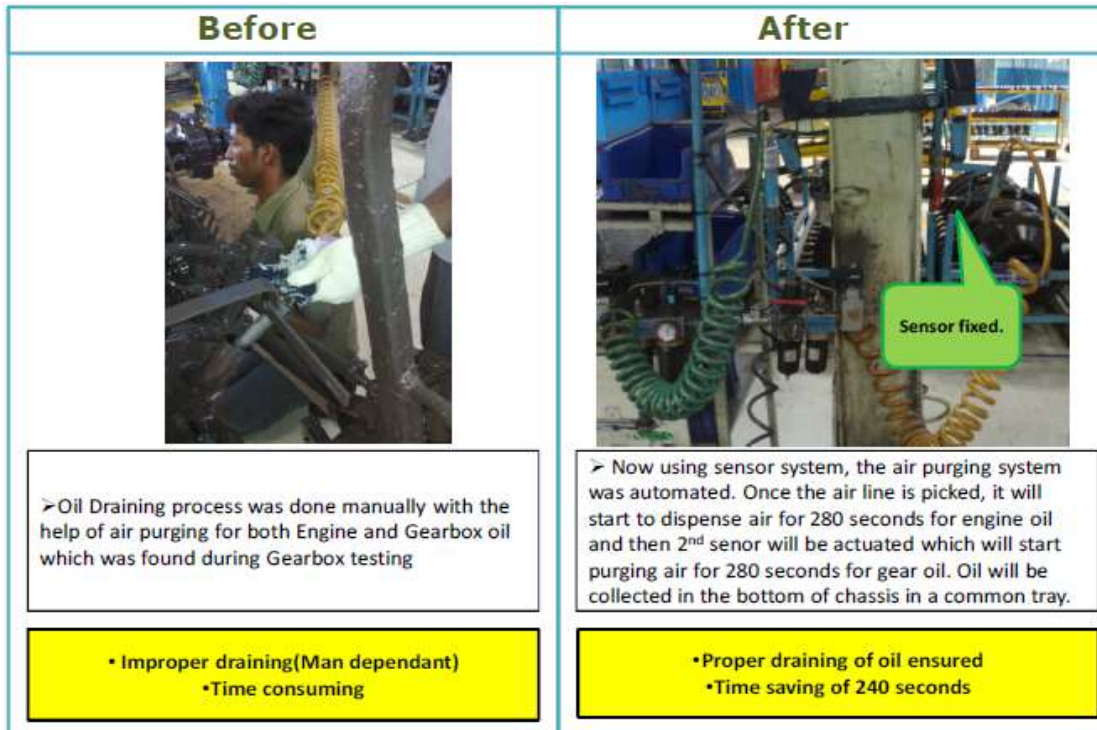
Cell 5- Stage 1 – Engine Oil & Gear Oil Automation
